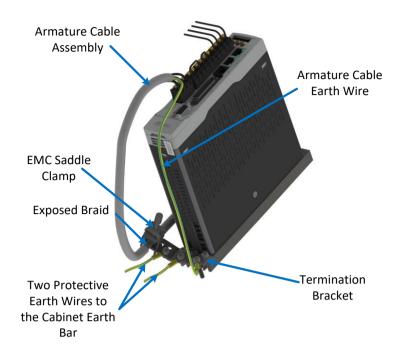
D2103 Armature Cable Shield Connection with Two PE Wires
